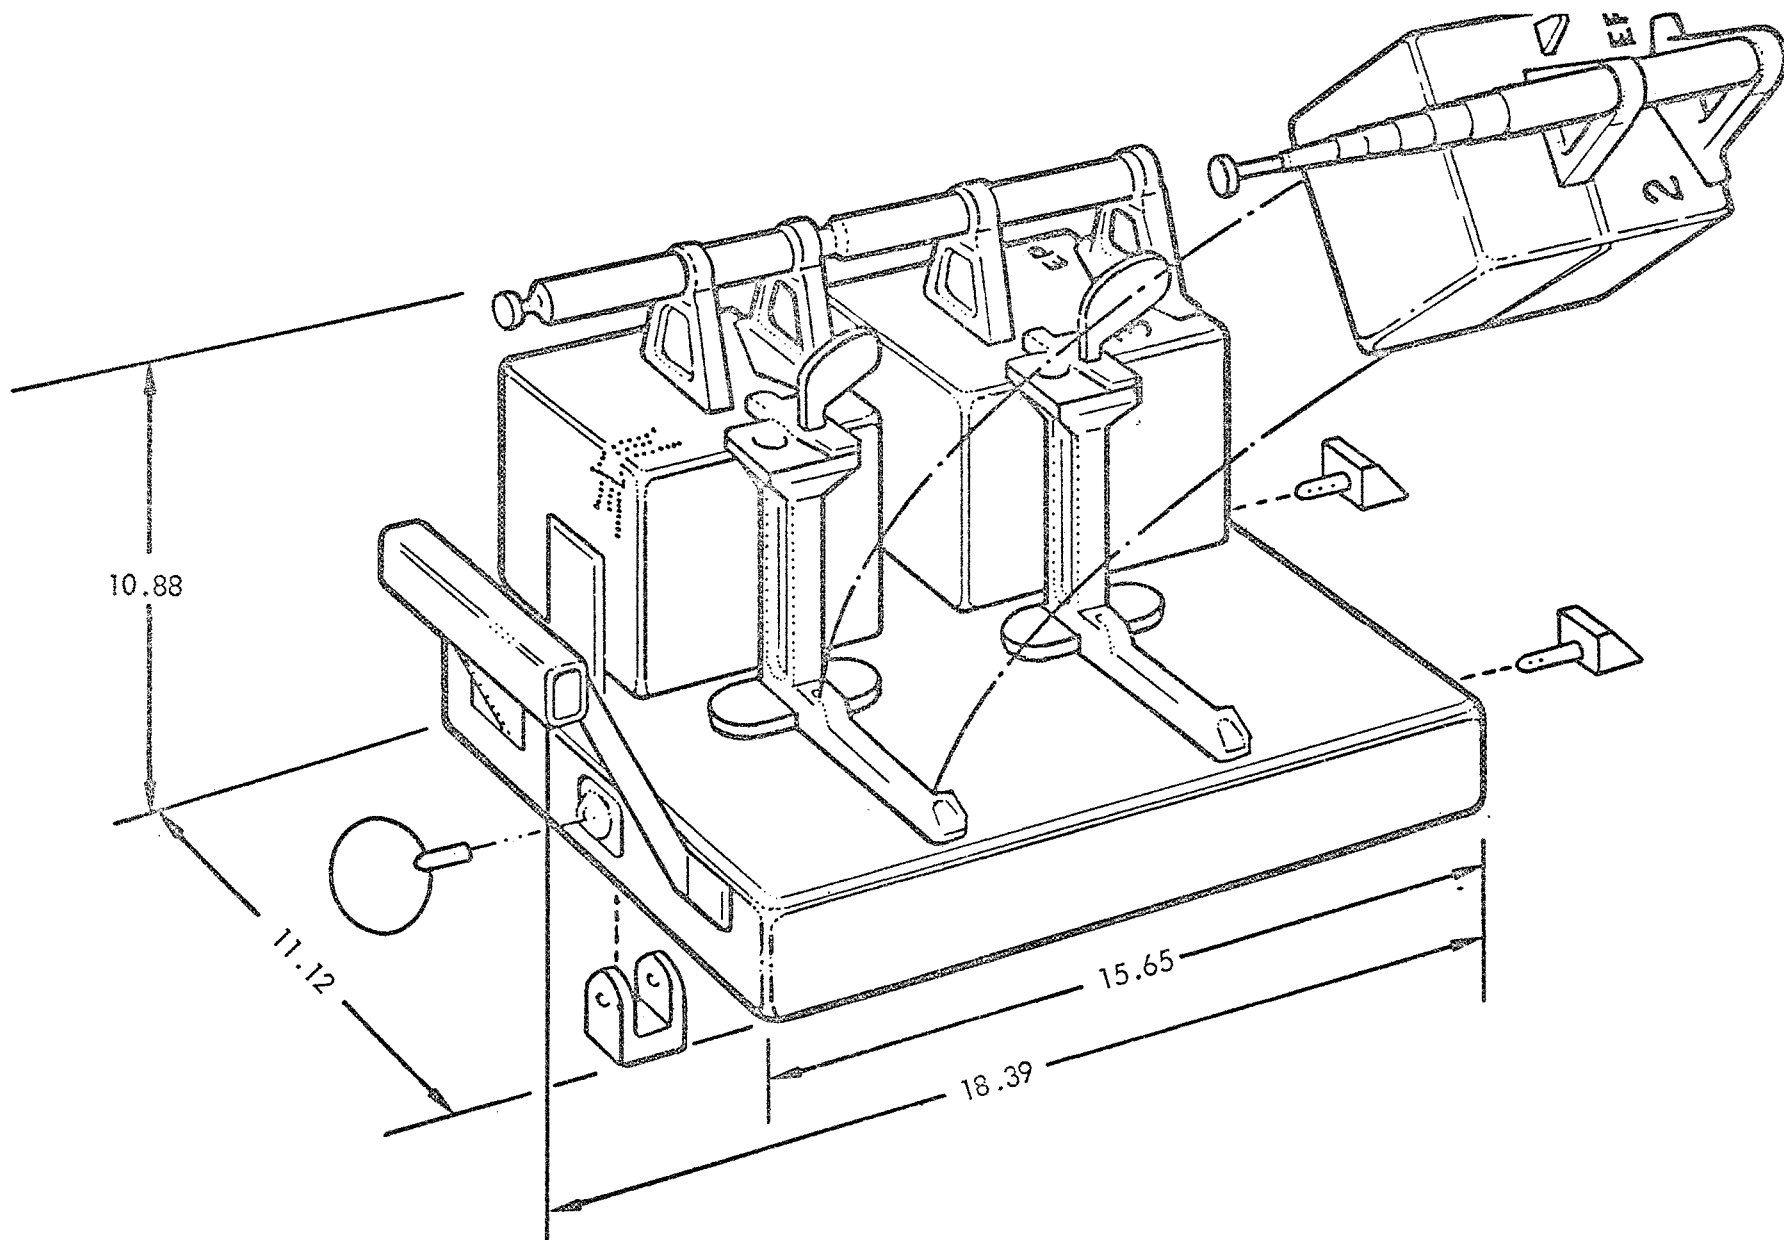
EXPLOSIVE PACKAGE TRANSPORT MODULE (BENDIX AEROSPACE)
